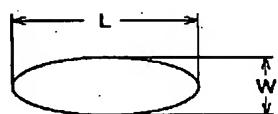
It is the cutting point explanatory view of the machinability trial in an example.
